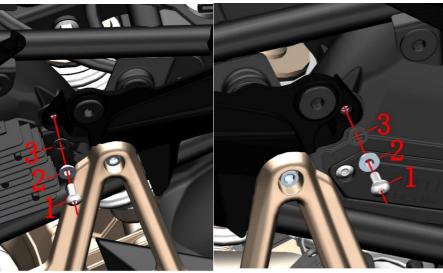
REAR COVER		REAR COVER COMPONENT 1	СНК	(0)
